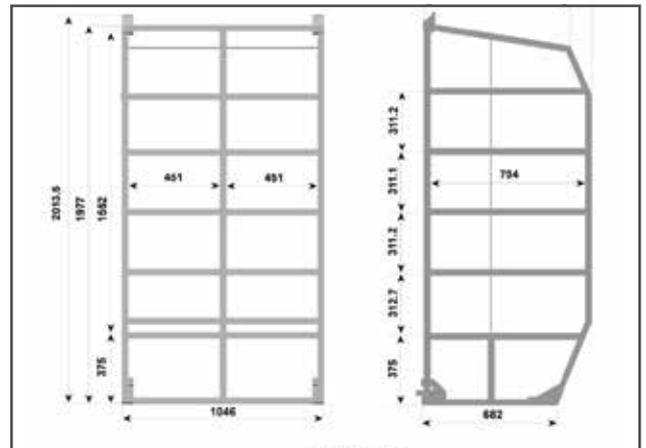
ISPR 6-post configuration dimensions – Front and Side View
